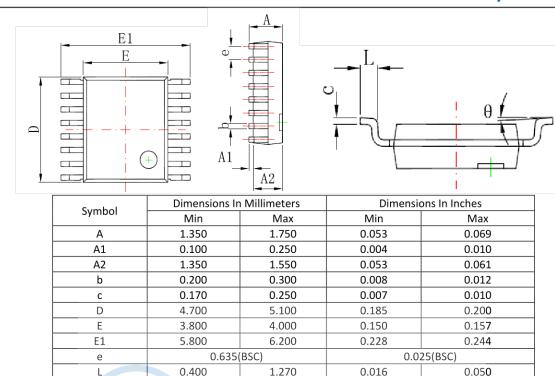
Lead SSOP Outline Package [SSOP-16]
